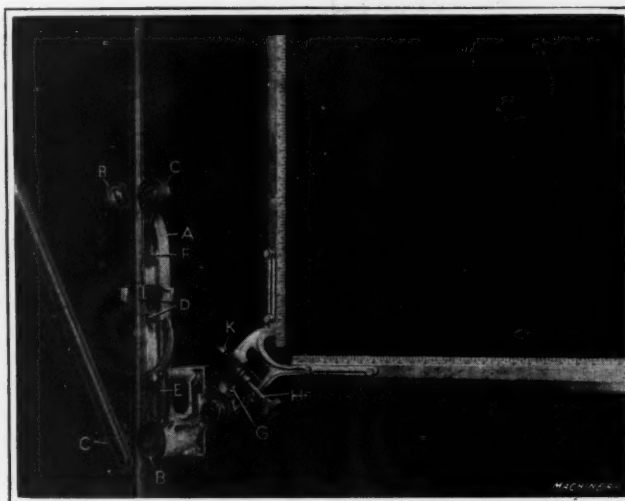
Detail View of Drafting Machine shown in Fig. 1
